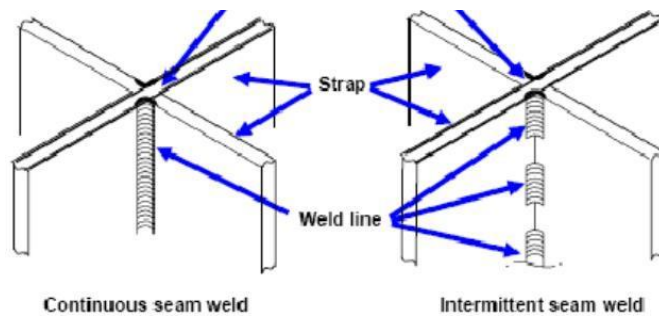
Continuous and intermittent welds (https://www.researchgate.net/figure/Continuous-weld-line-of-the-specimen-welded-by-the-proposed-LASER-welding-method_fig7_298897430).
